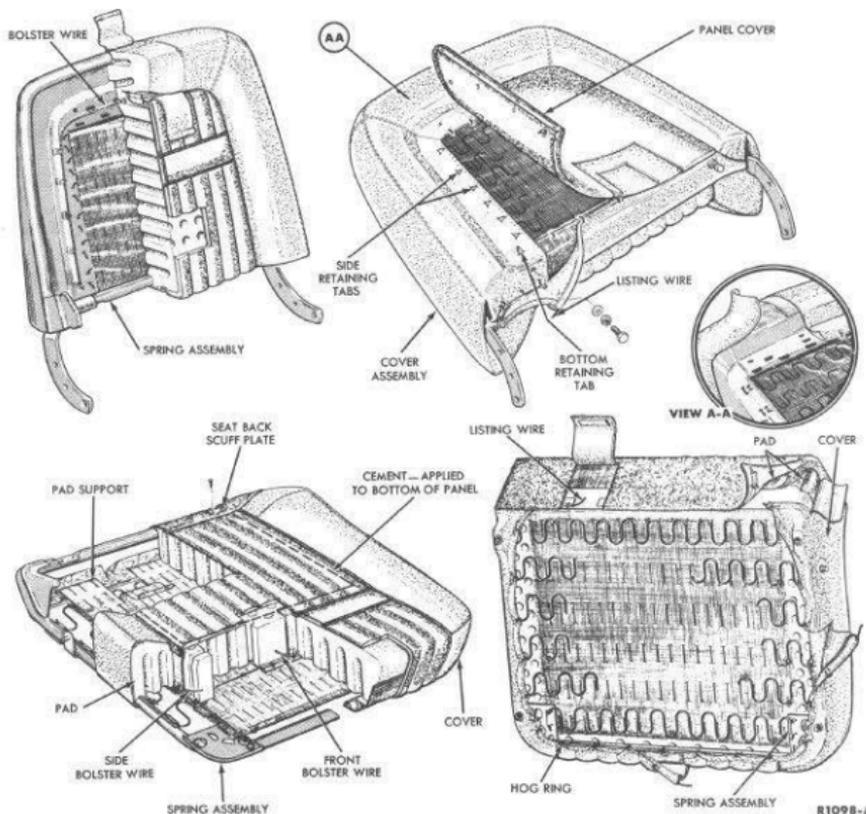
Futura and S-22 Front Seat Back and Cushion
